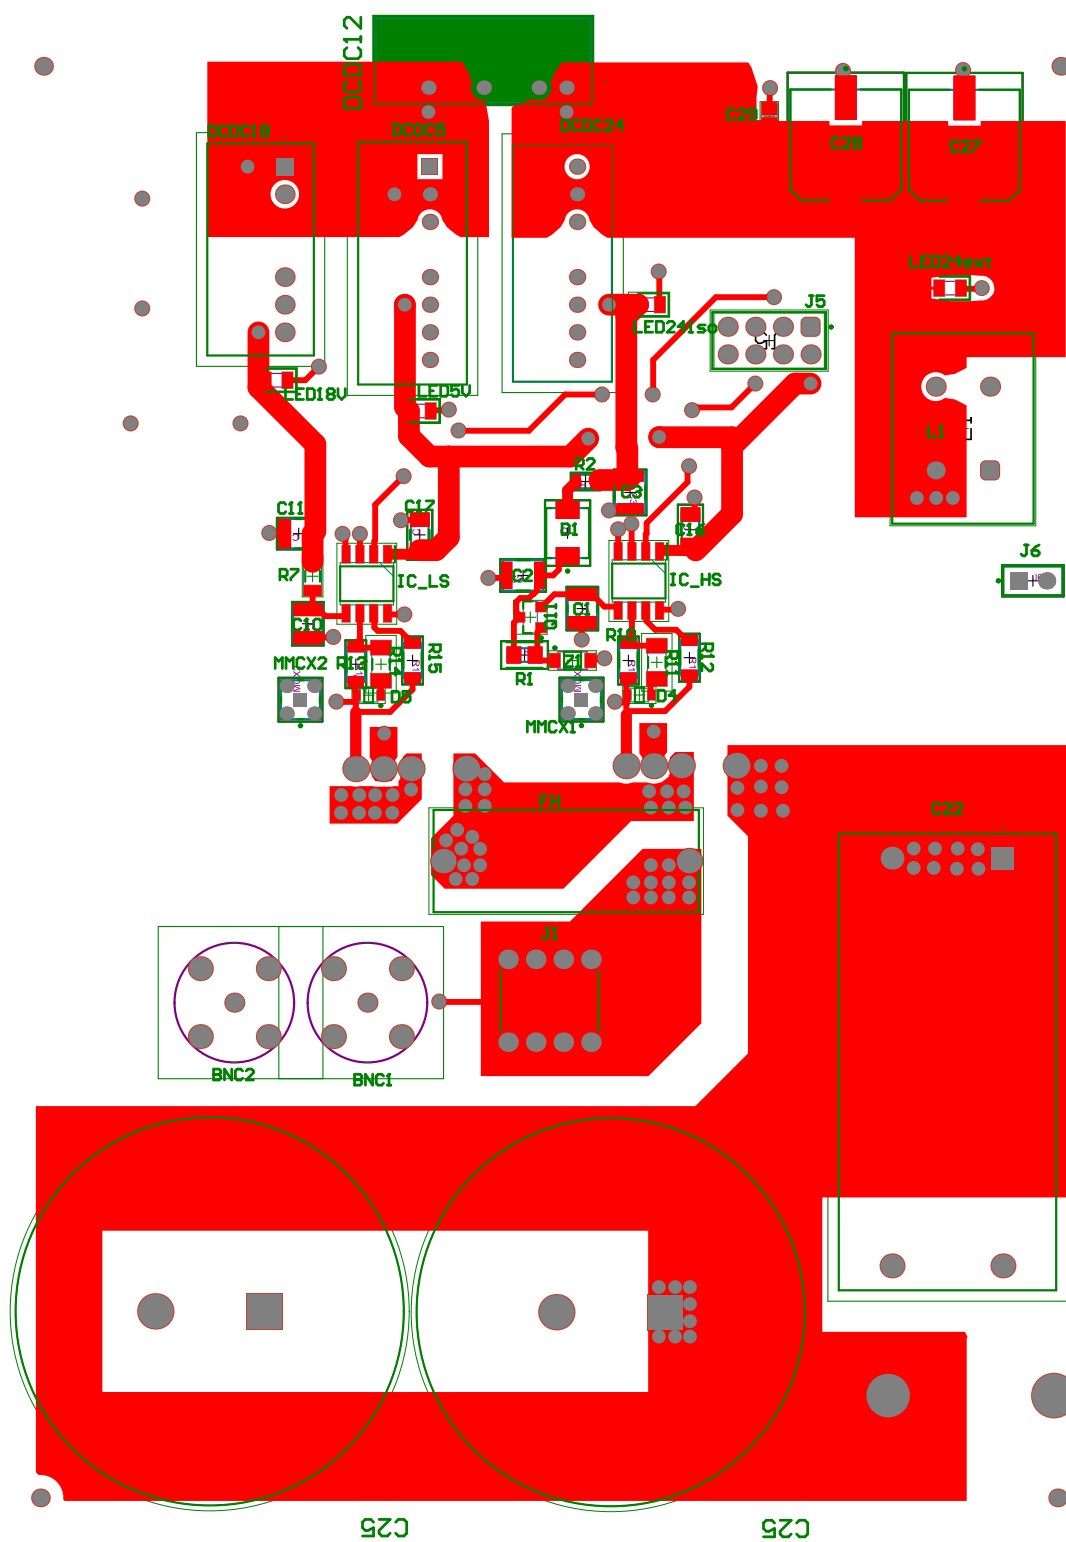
PCB "Conv" without perforation top side. The board measures 105 mm by 142 mm.
